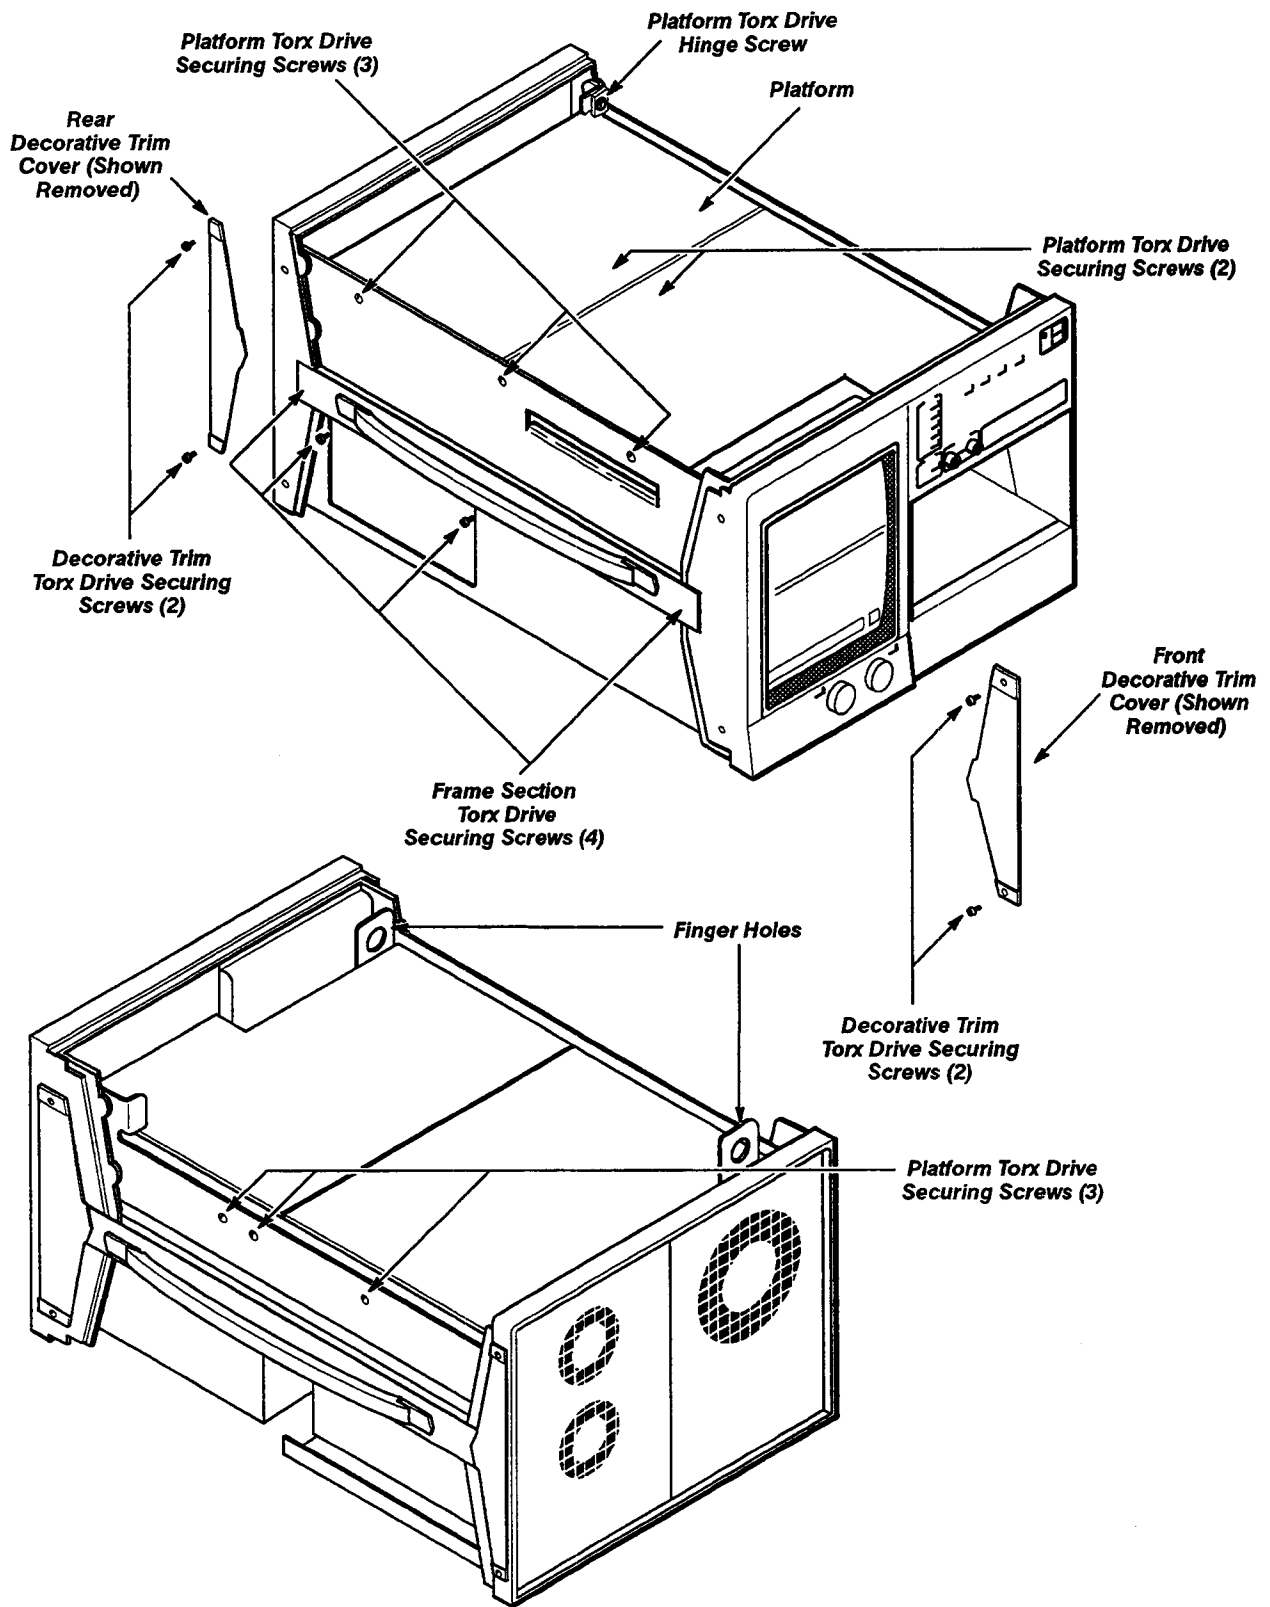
Removing/Replacing the Left Side Frame Section and Raising the Platform
